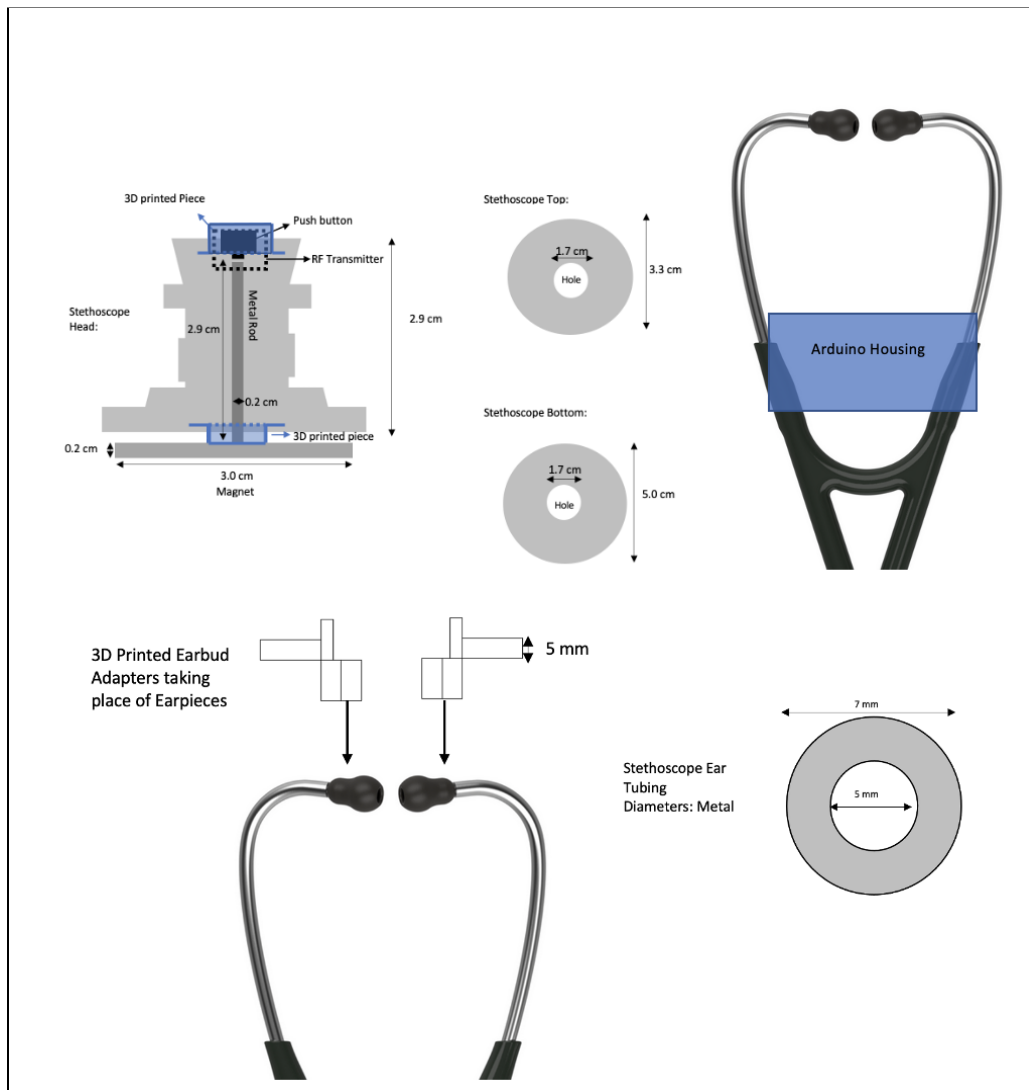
Original design concepts of the stethoscope head, housing unit, and earbud adapters for the *EchoScope*.
